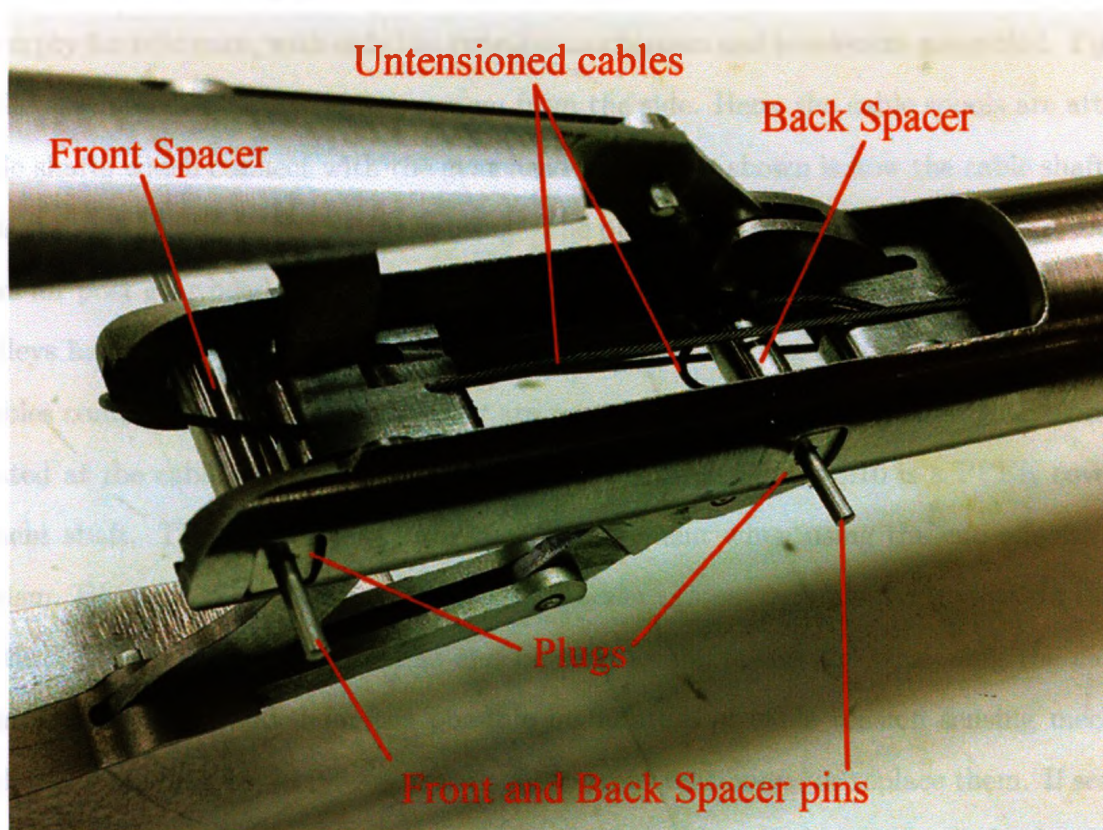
The assembled grasper in the instrument shaft with untensioned cables.
